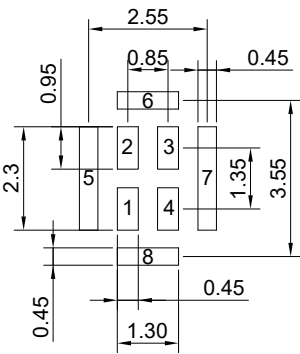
PCB Solder Pad Layout of SDMO07A-26
